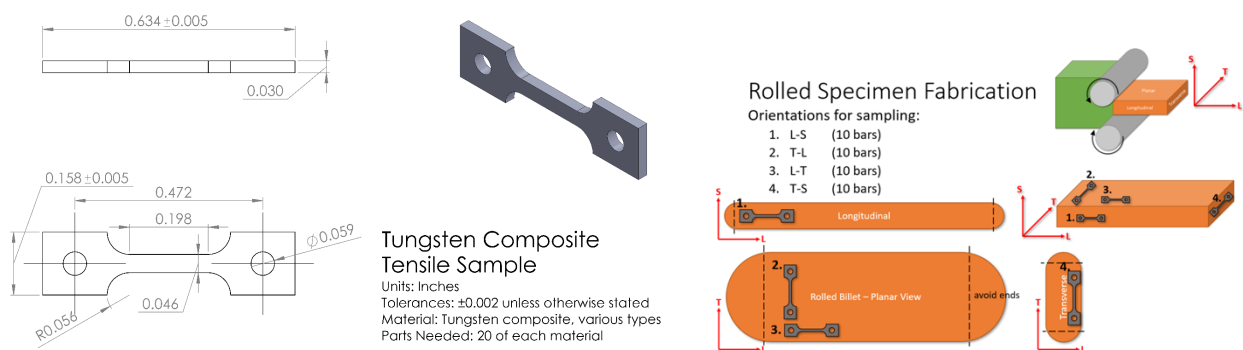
Left: Subsize tensile specimen design; Right: Specimen orientations for rolled specimens.
